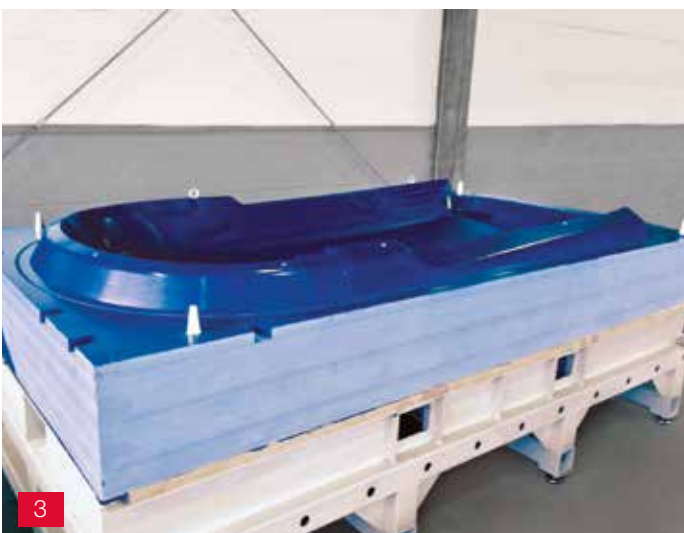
Resin infusion: Lay-up of dry fibers / fiber package. Peel ply, flow mesh, resin flow and vacuum channels to be put in place. Build-up of vacuum bag. Impregnation of composite package through injection of thermosetting resin via drop of pressure generated through vacuum.
